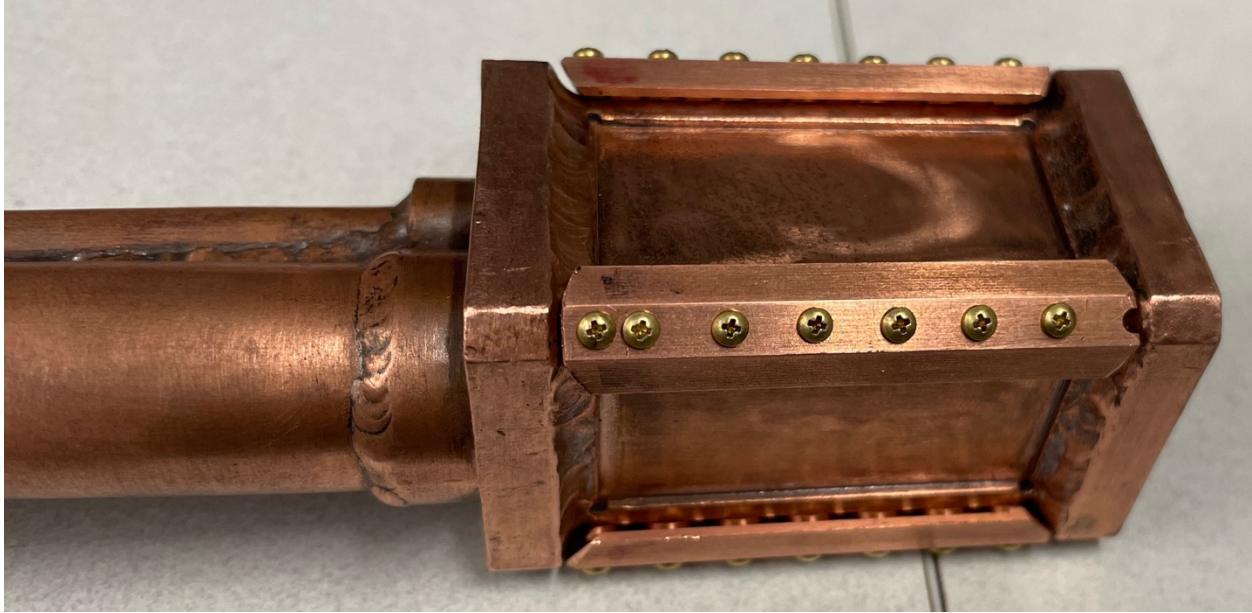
Initial welded assembly including screwed on jet-directing covers.
